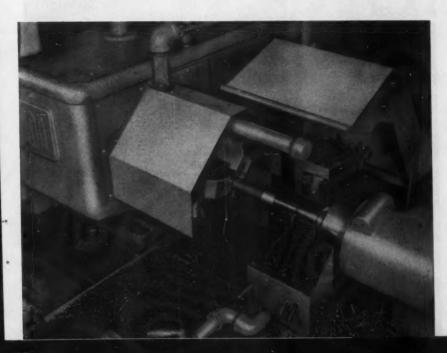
This work-piece is held between centers and gripped on a rough cast surface by three floating jaws of a compensating type power-operated chuck.
